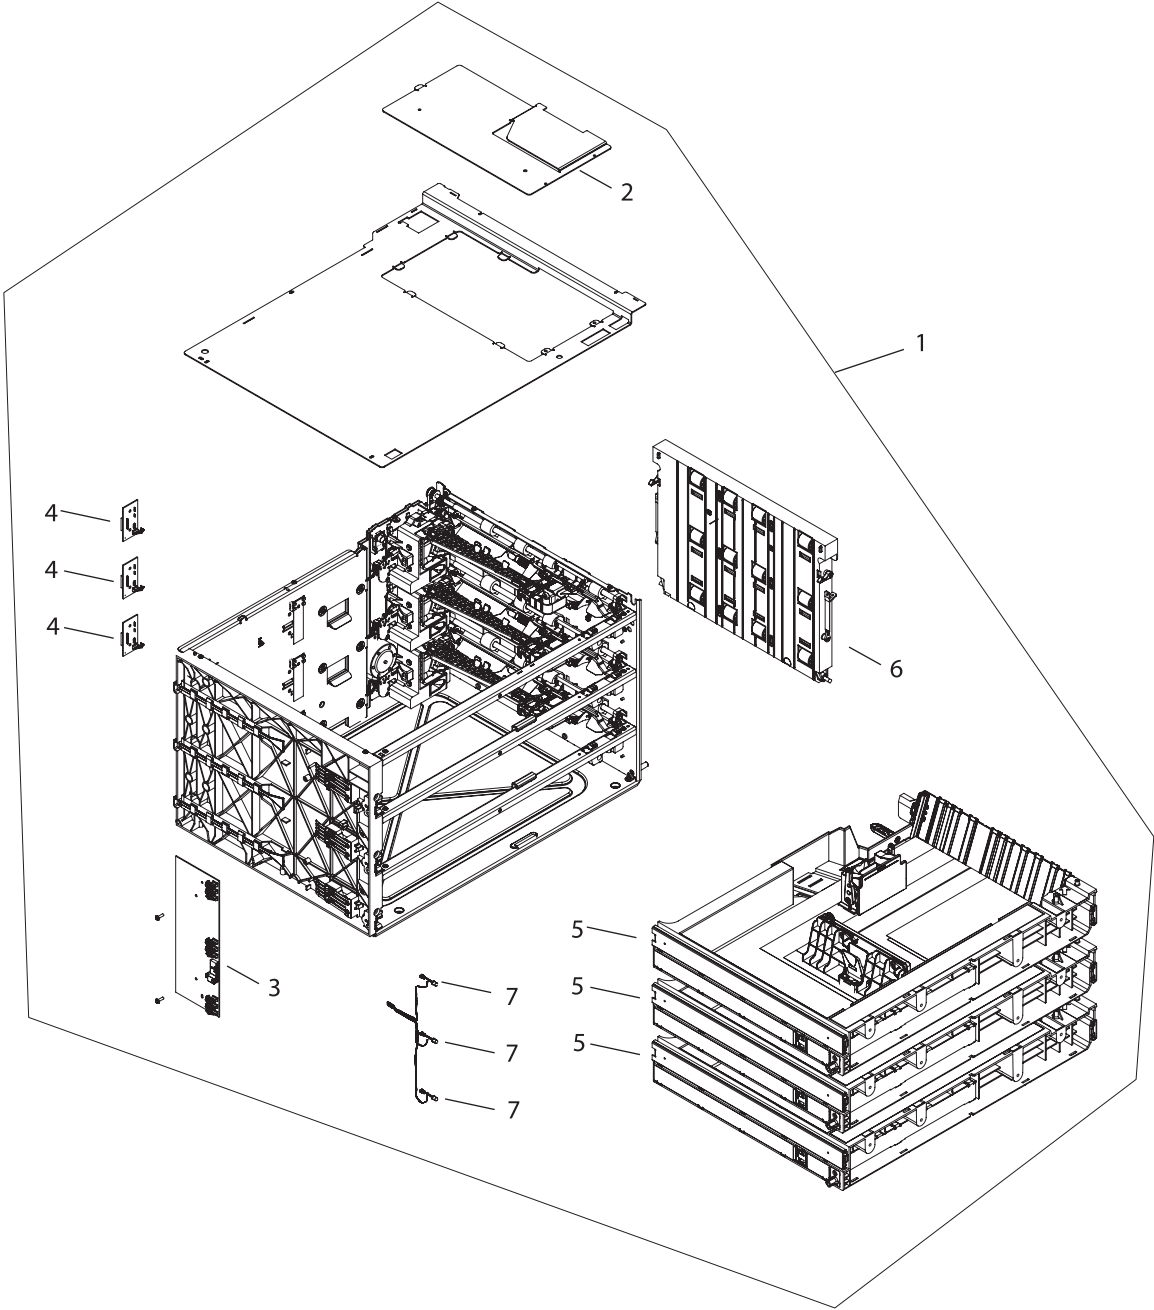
Trays 2, 3, and 4 main assembly parts diagram
